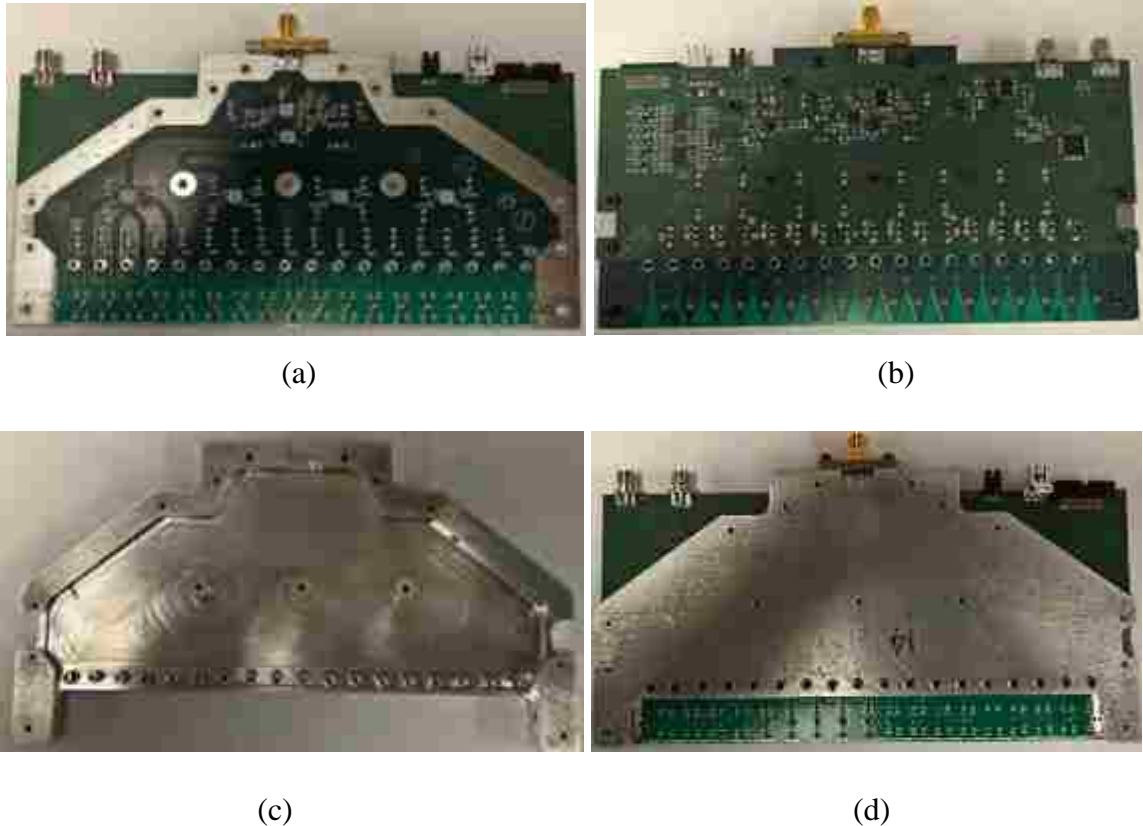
(a) Assembled and bonded antenna array board. (b) Assembled and bonded daughter board. (c) Aluminum shield. (d) Assembled linear array.
